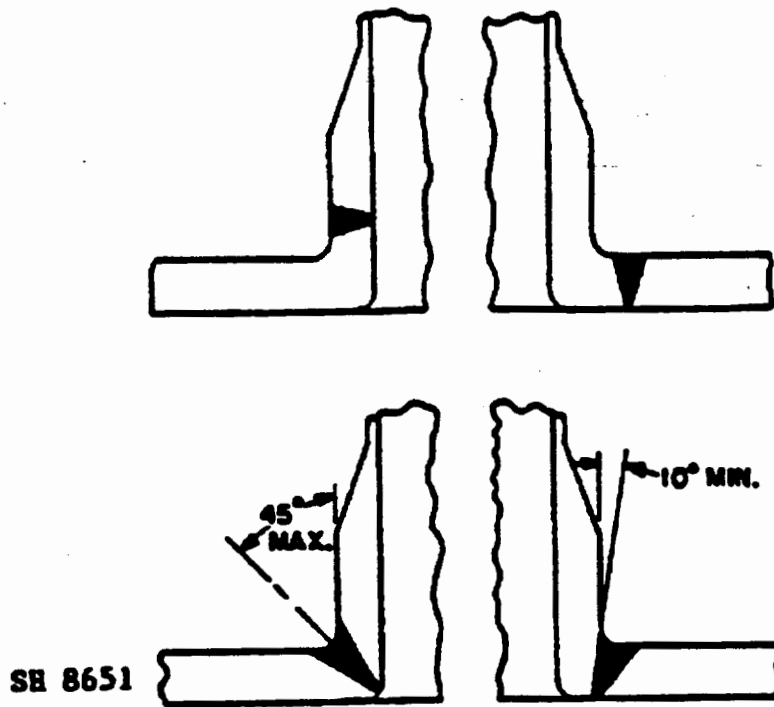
Examples of acceptable weld joint locations.
